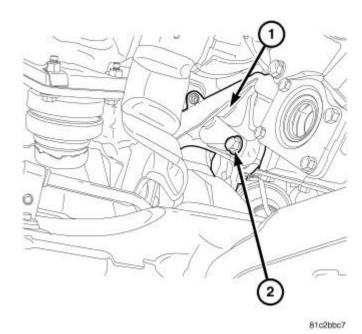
Rear Mount Side Bolt Courtesy of CHRYSLER LLC
